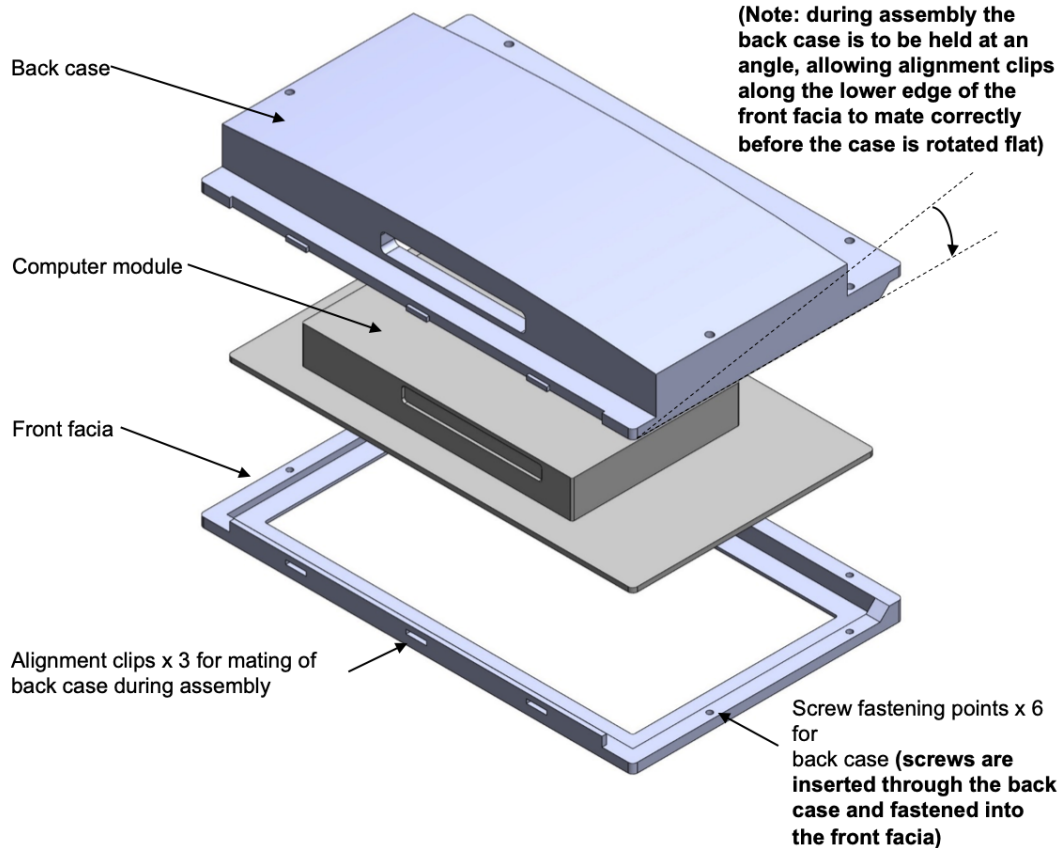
Exploded assembly drawing of the all-in-one computer.
